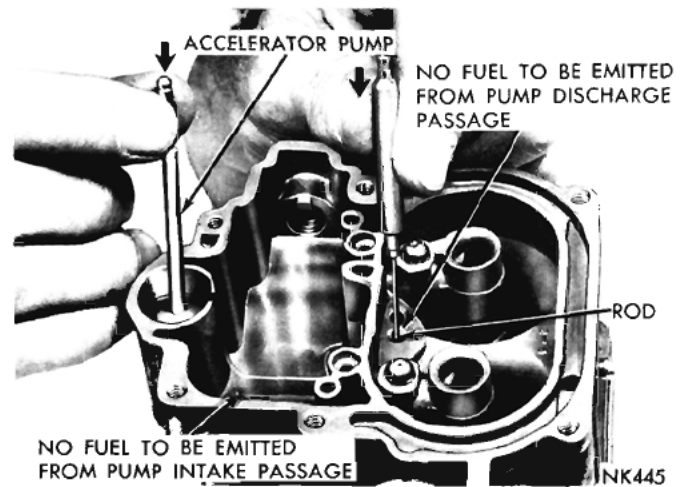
Testing Accelerator Pump Intake and Discharge Check Balls
